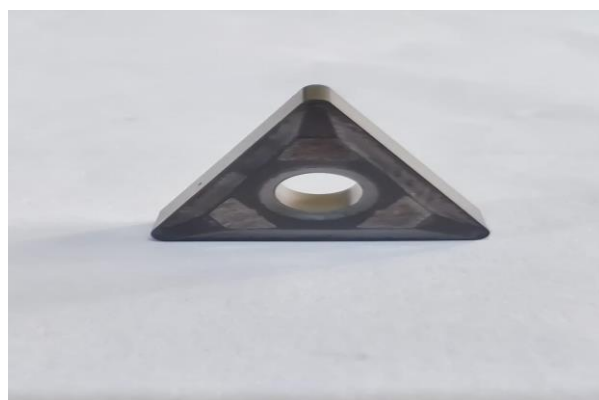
Uncoated insert - Specification- TNMG 160408 EN - CF; CF - Angle of relief (Negative); Included angle of tool 60 degrees, Length of cutting edge 16.5 mm; Thickness 4.76 mm; Radius of corner 0.8 mm; Insert hand N-Neutral; Dia of hole -3.81 mm
